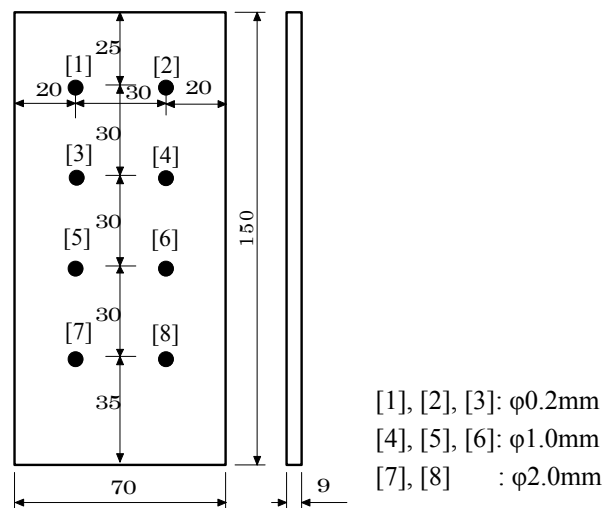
Geometry and dimension of tested specimen (Unit in mm)
